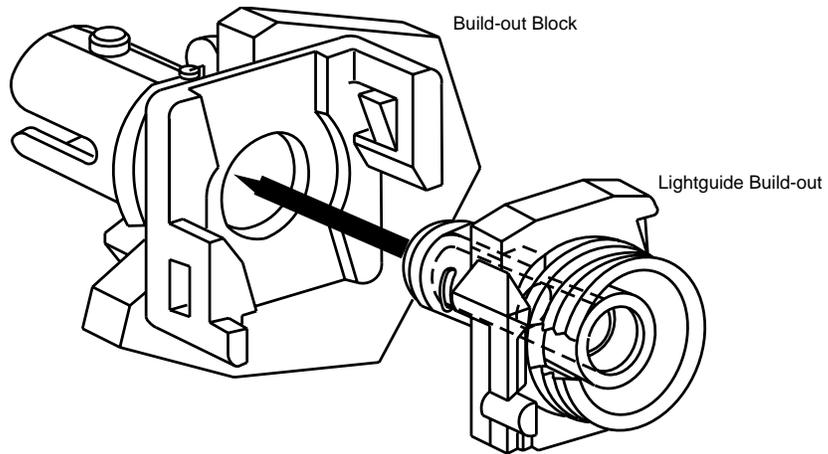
shows the build-out block and an ST-type LBO assembly.
